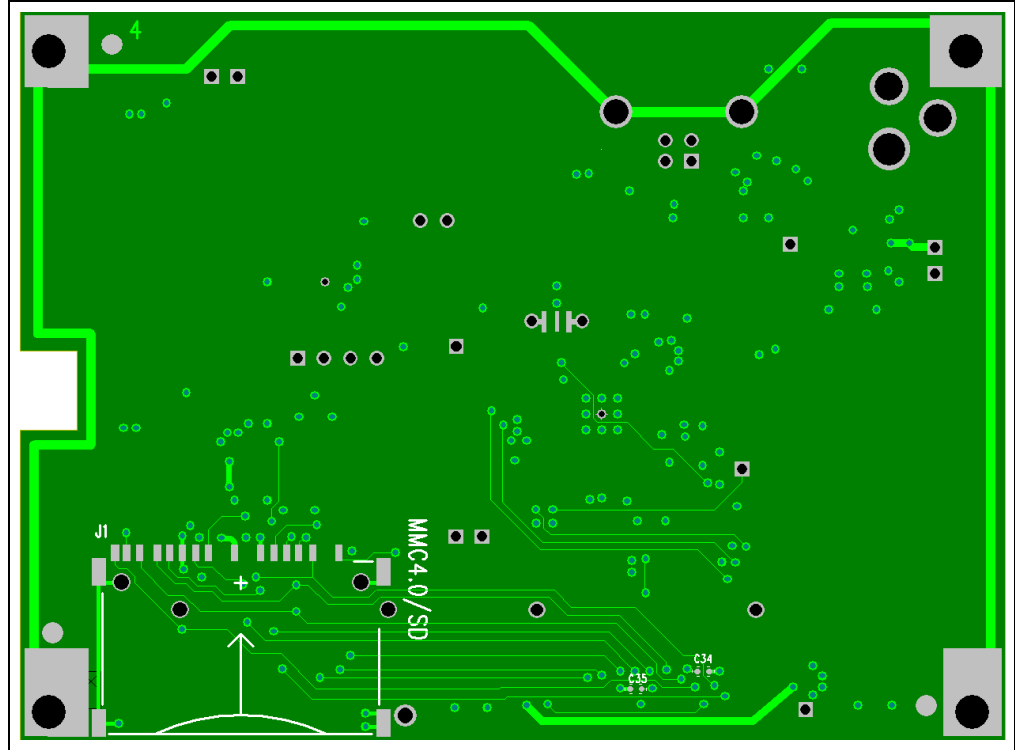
BOTTOM LEVEL SOLDIER SIDE AND COPPER LAYER
